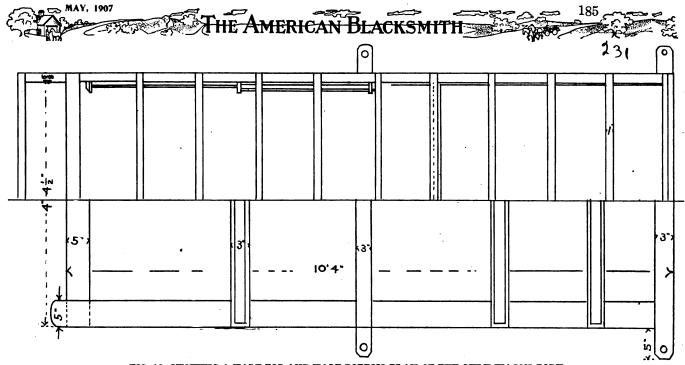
SHOWING A HALF TOP AND HALF BOTTOM PLAN OF THE MILK WAGON BODY
